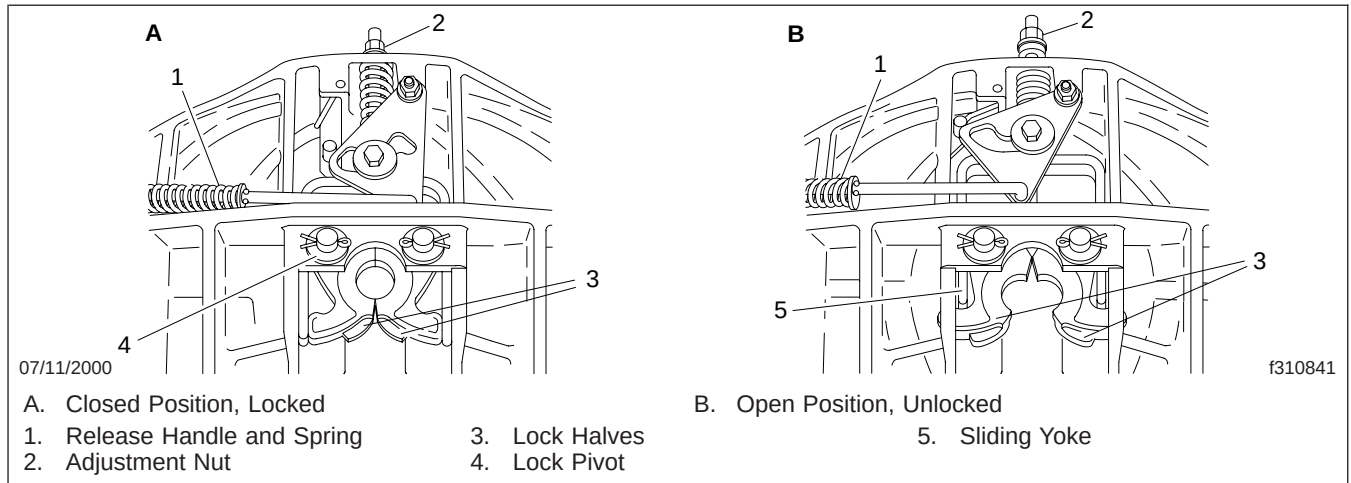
, Type "B" Kingpin Lock Mechanism (bottom view)
